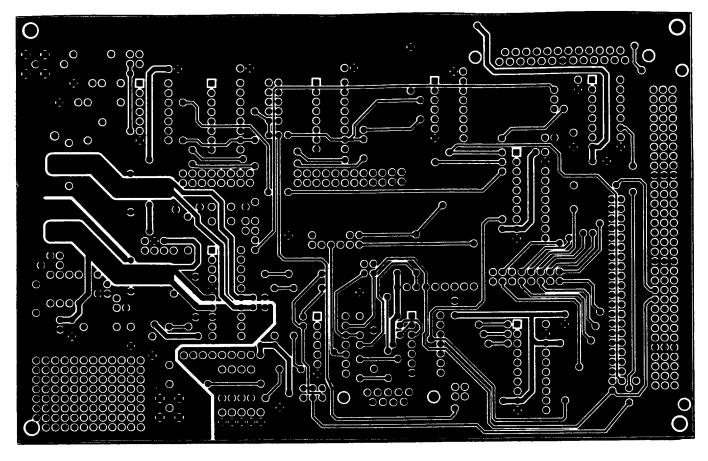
AD7701/AD7703 Evaluation Board Component Side Layout
